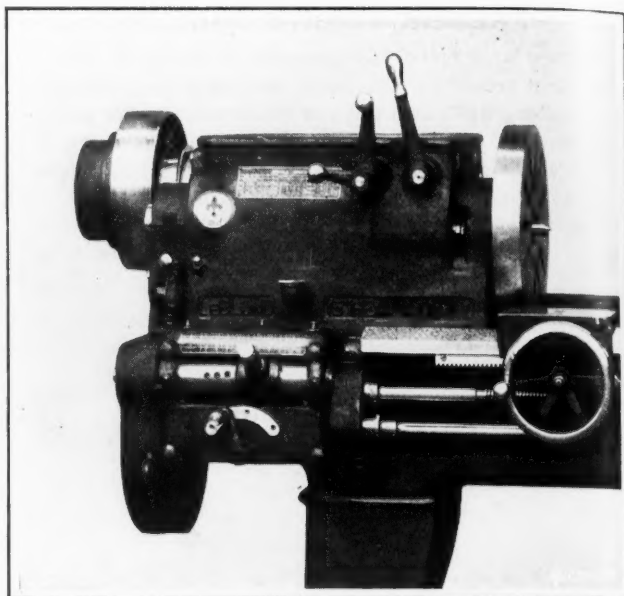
Single-pulley Drive Geared Headstock which gives Nine Spindle Speeds
